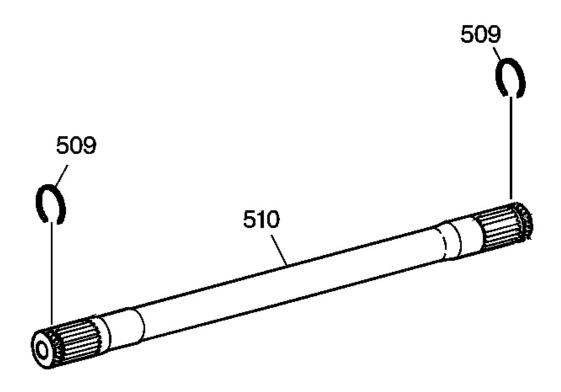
Drive Axle Retainer Rings & Output Shaft Courtesy of GENERAL MOTORS CORP.
